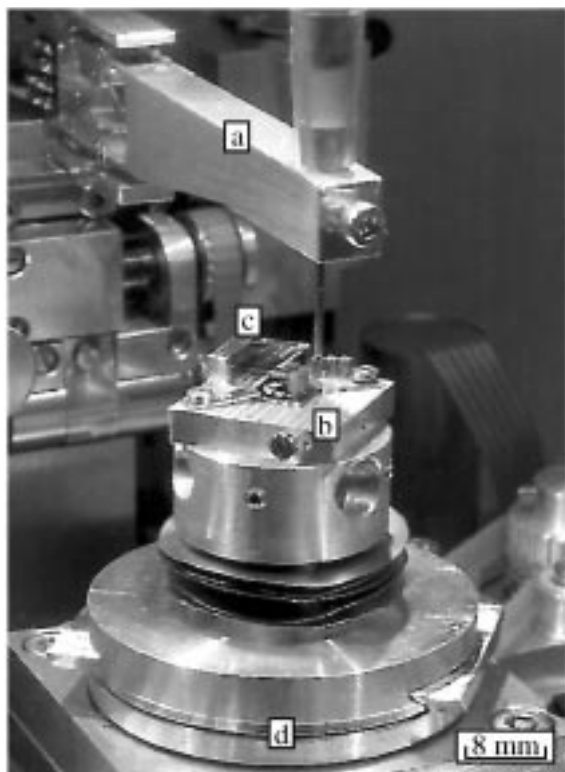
The assembly equipment. Seen are the vacuum tool with its force cell (a), the heating table (b) with its alignment corner (c) and the connector to the positioning stage (d). The photograph is taken when three piezoceramic elements have been assembled.
